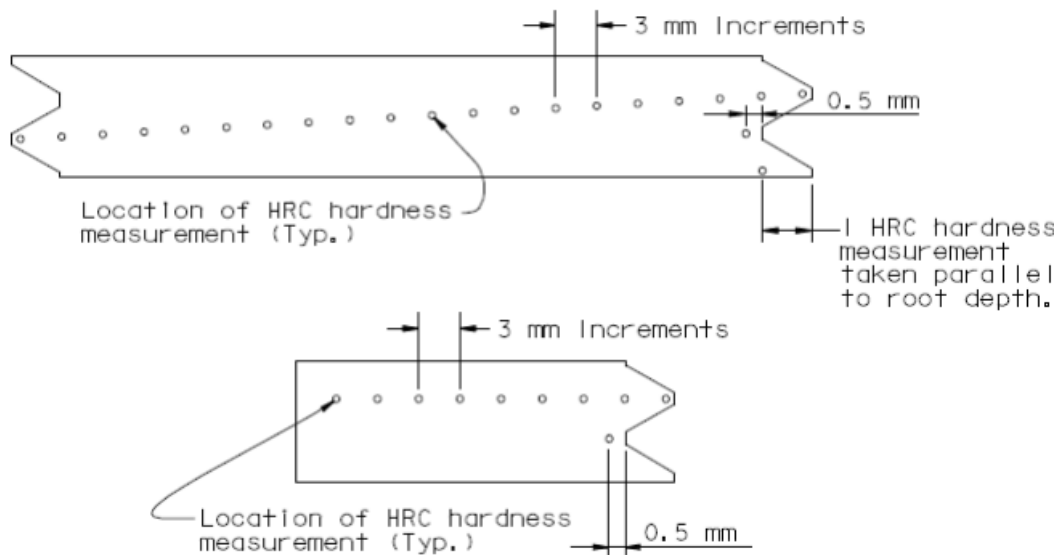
Test Coupon Locations on Rod Pieces
